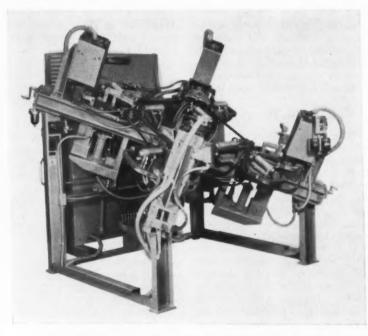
Multiple-gun type projection welder for card-table fabrication
